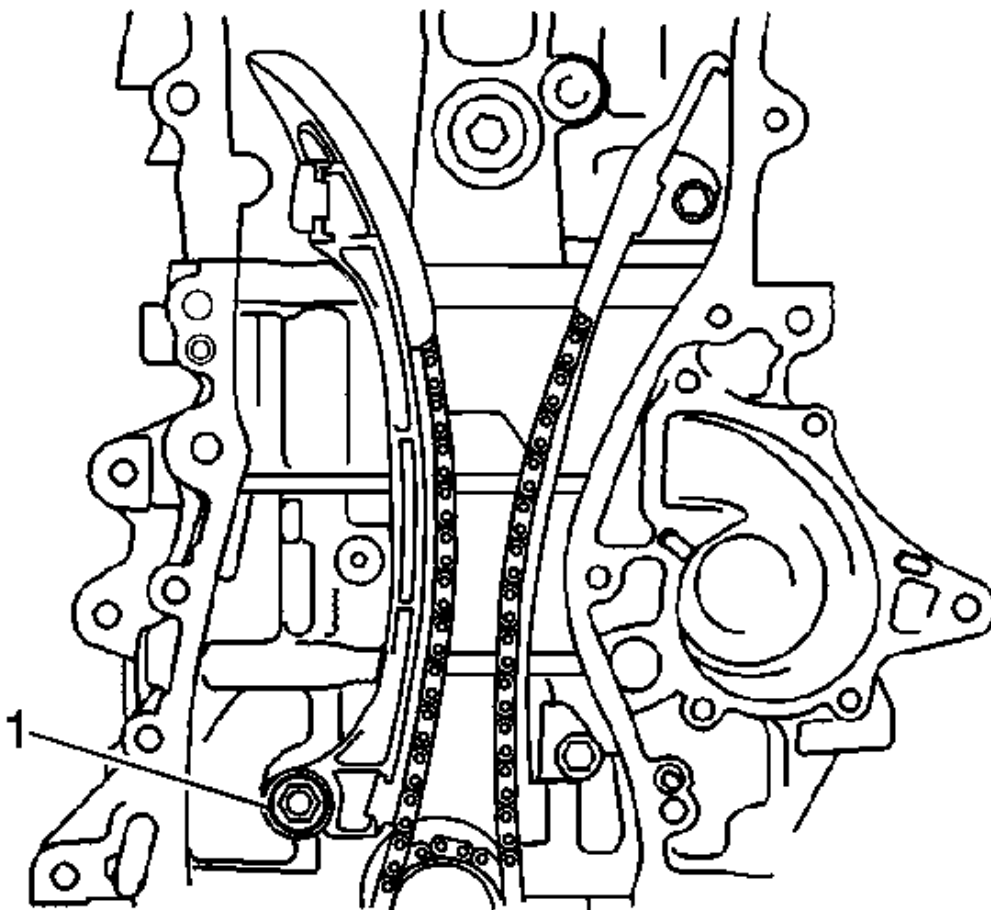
View Of Chain Tensioner Slipper & Bolt
